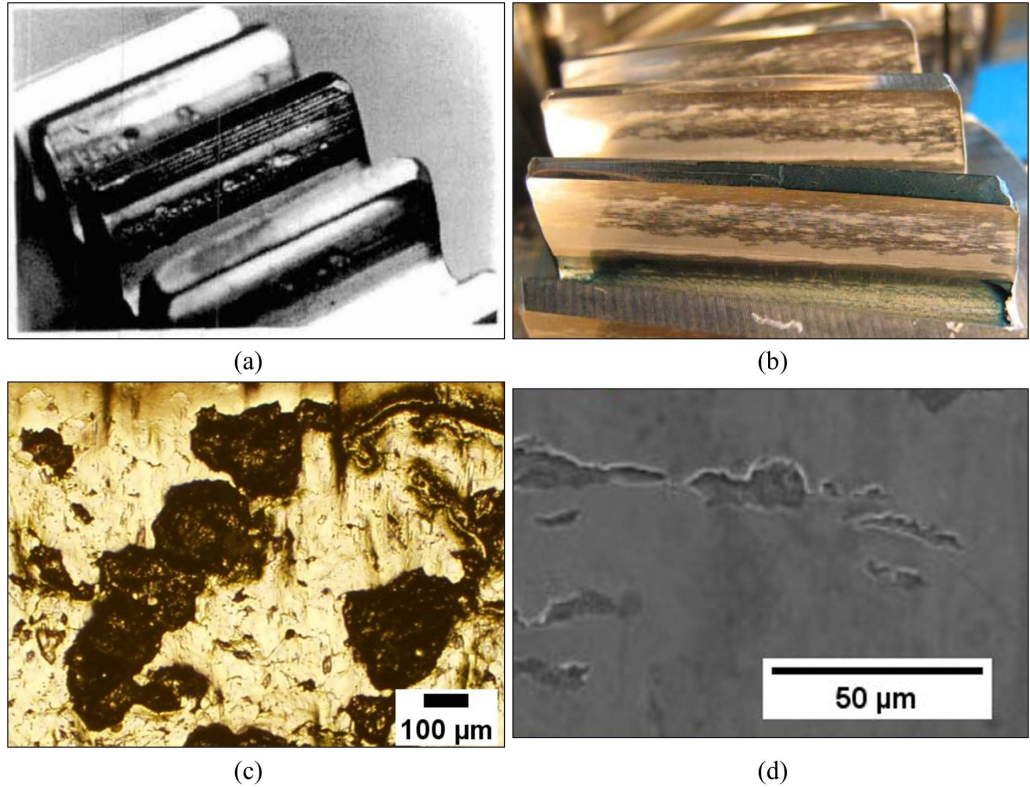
Examples of macropitting and micropitting on gear teeth. (a) Macropitting on a spur gear [41], (b) micropitting on a helical gear [42], (c) macropits on a gear tooth mould at the micro scale, (d) micropits at the micro scale [43].
